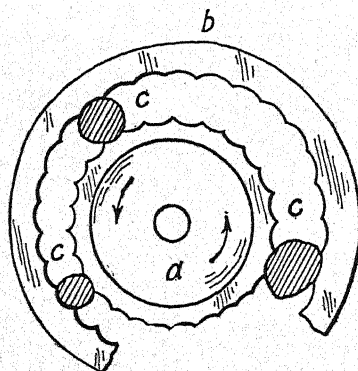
Cross-section of mechanical squeezer. *a.* Toothed cylinder. *b.* Housing. *c.* Wrought-iron ball.
